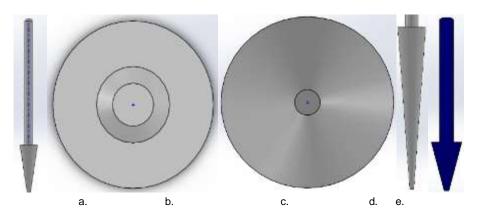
Three-dimensional modeling of three types of dental cutters *a. Front view, b. Top view, c. Bottom view, d. Detail on the milling area, e. longitudinal section
